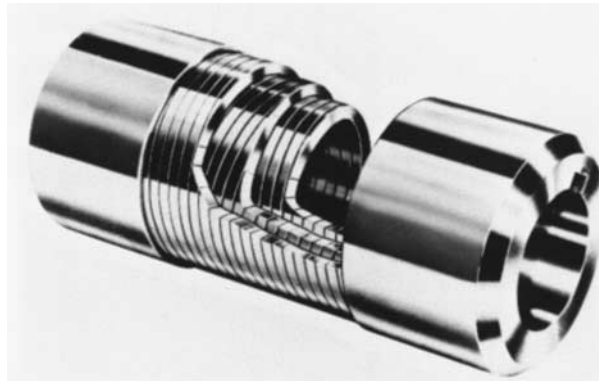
Uniflex flexible-spring coupling. (*Lovejoy, Inc.*)
